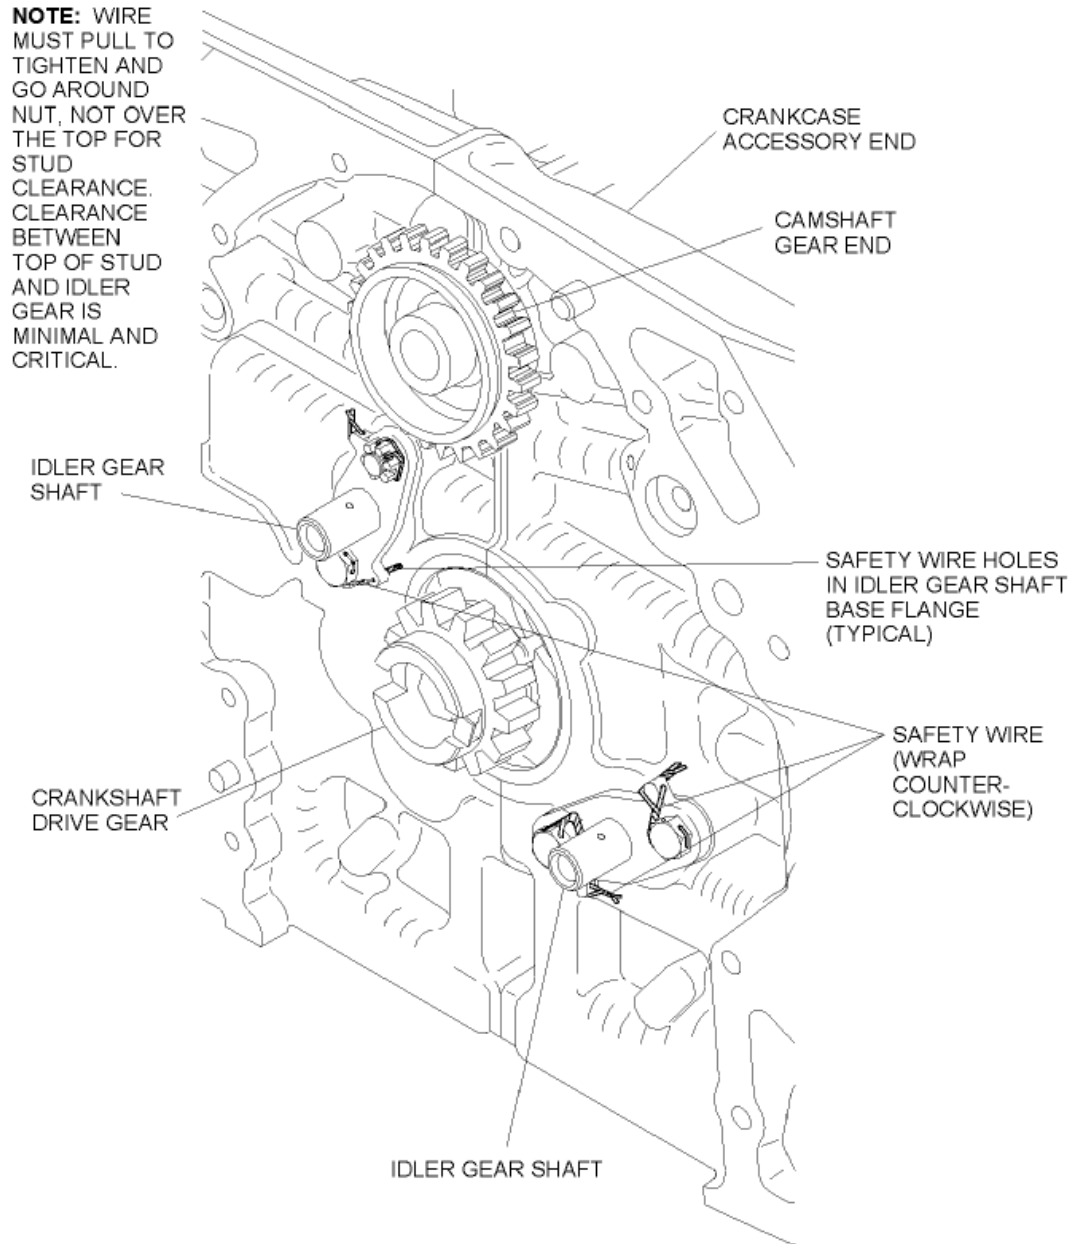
• Idler Gear in Crankcase (cont'd.)
